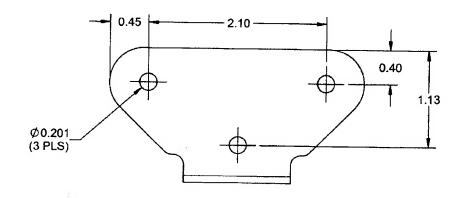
LOCATION OF D4330-3 DOOR BRACKET MOUNTING HOLES (SPACEDOOR™)
